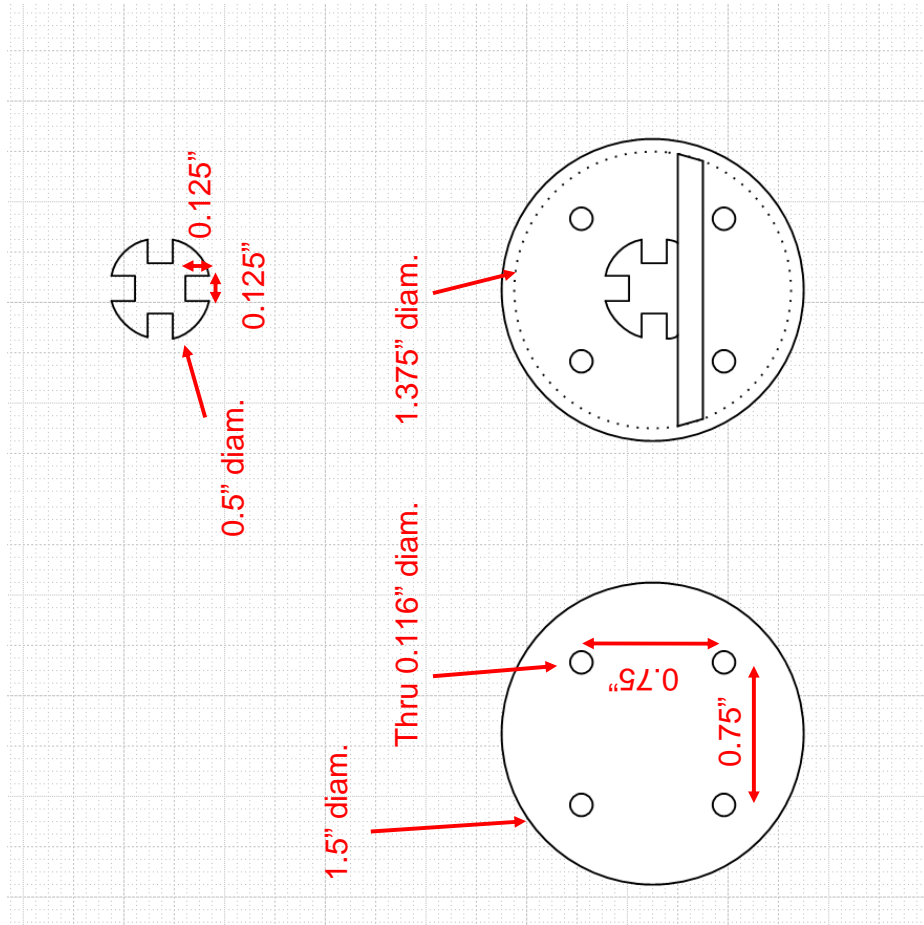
Schematic drawing of dipper tail zoomed in on the bottom where the tail attaches to the 1 K pot. This configuration of holes is designed for the Cryomagnetics 1 K dipper probe. For the dilution refrigerator an adaptor is needed.
